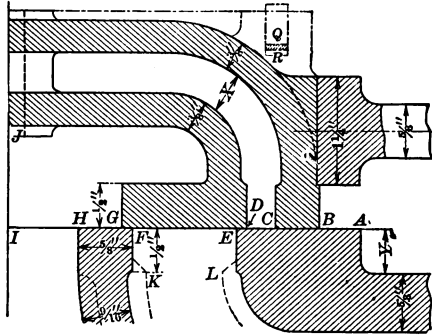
SHOWING LAYOUT OF ALLEN OR "TRICK" VALVE
